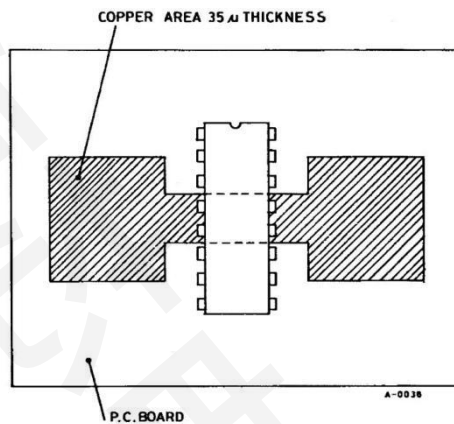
Example of P.C. Board Copper Area which is Used as Heatsink
